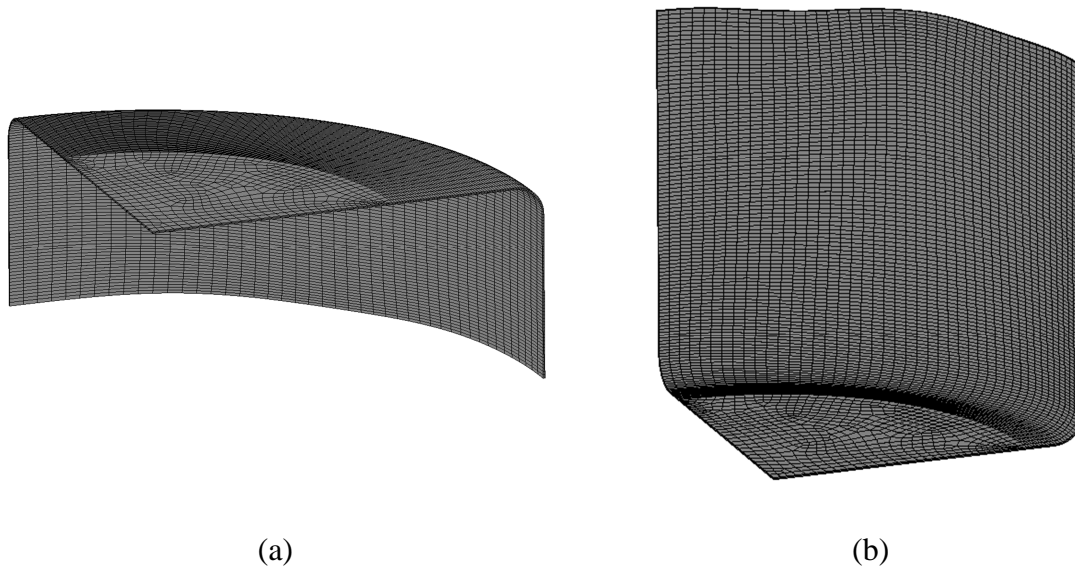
Redrawing operation – Aluminum cup: (a) Before redrawing (b) After redrawing.
